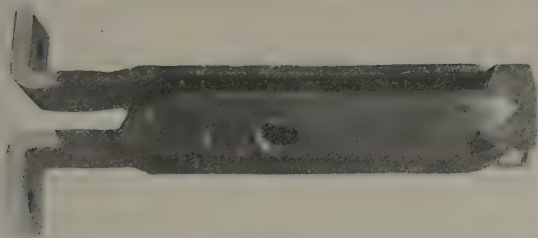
Brake Shoe Key, M. C. B. Standard.
